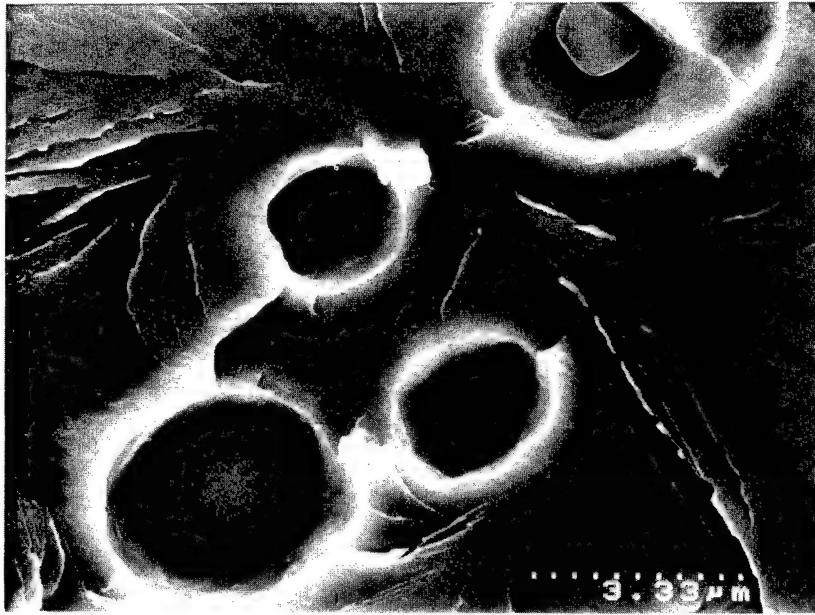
Initiation of Cleavage Fracture ahead of a Growing Fibrous Crack in C/Mn Weld Metal (courtesy Dr Y Zhang). Note that: whereas at low temperatures, cleavage fracture is nucleated on the (brittle) inclusions; ahead of the growing fibrous crack, voids have formed around the inclusions and cleavage is nucleated (probably on MAC products) *between* inclusions. See also Figure 2.
